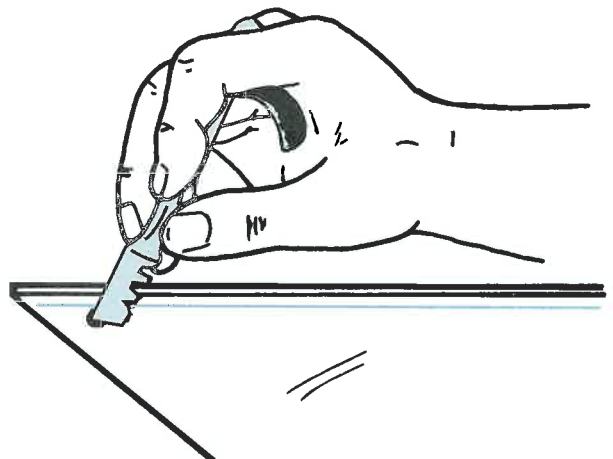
Many glass cutters have grooves for trimming jagged edges.
